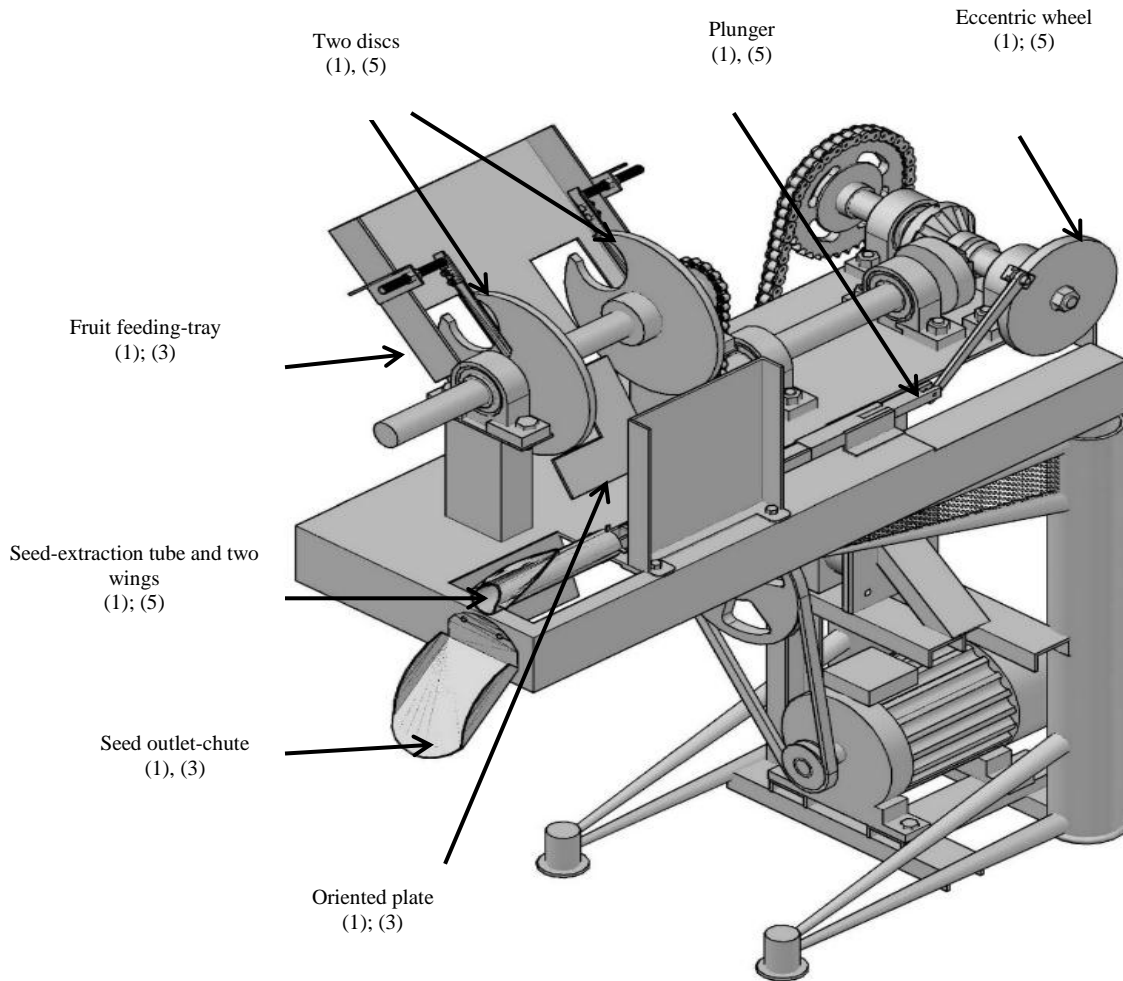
Machine views demonstrating the design idea of a seed extractor, with the numbers in brackets indicating parameters necessary for design of different parts.
